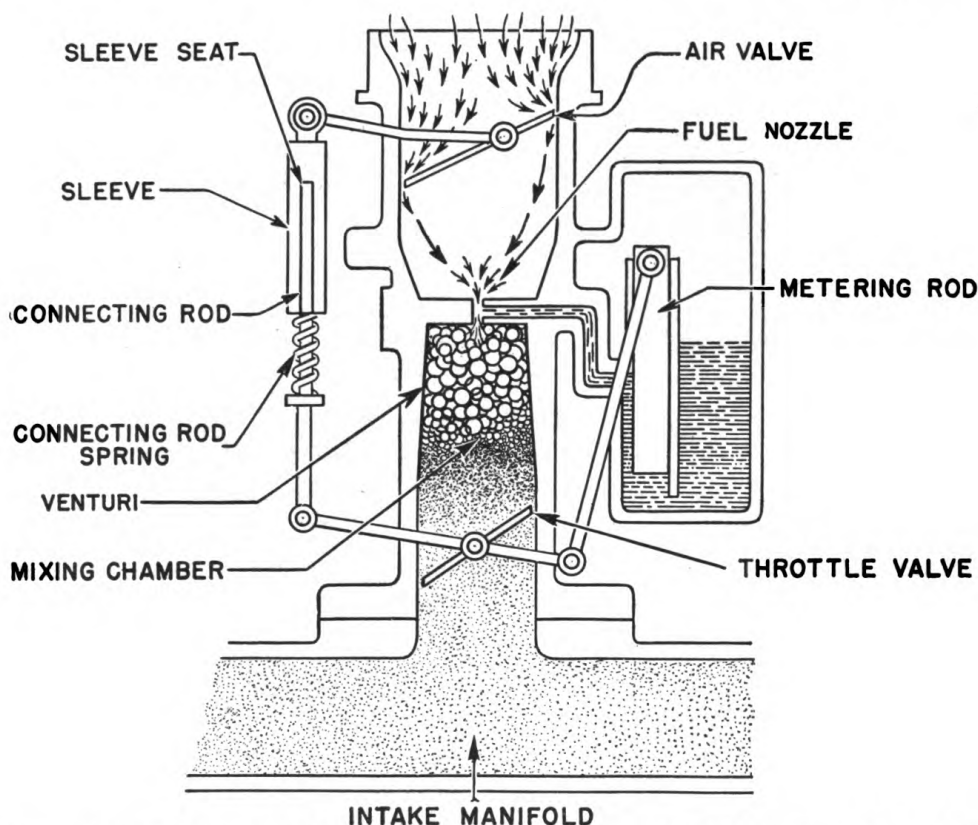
Section through body of a mechanical air valve, high vacuum, downdraft carburetor.
